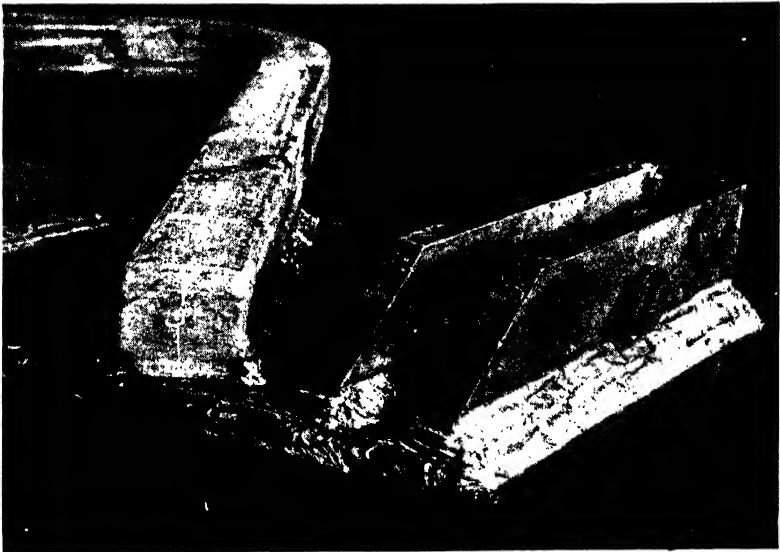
The same structure as shown in Fig. 141 after the physical cleaning process. Note the many small ripples, weld joints, and tight fits which may harbor chemical deposits from the welding process. (Courtesy of R. G. LeTourneau, Inc.)
